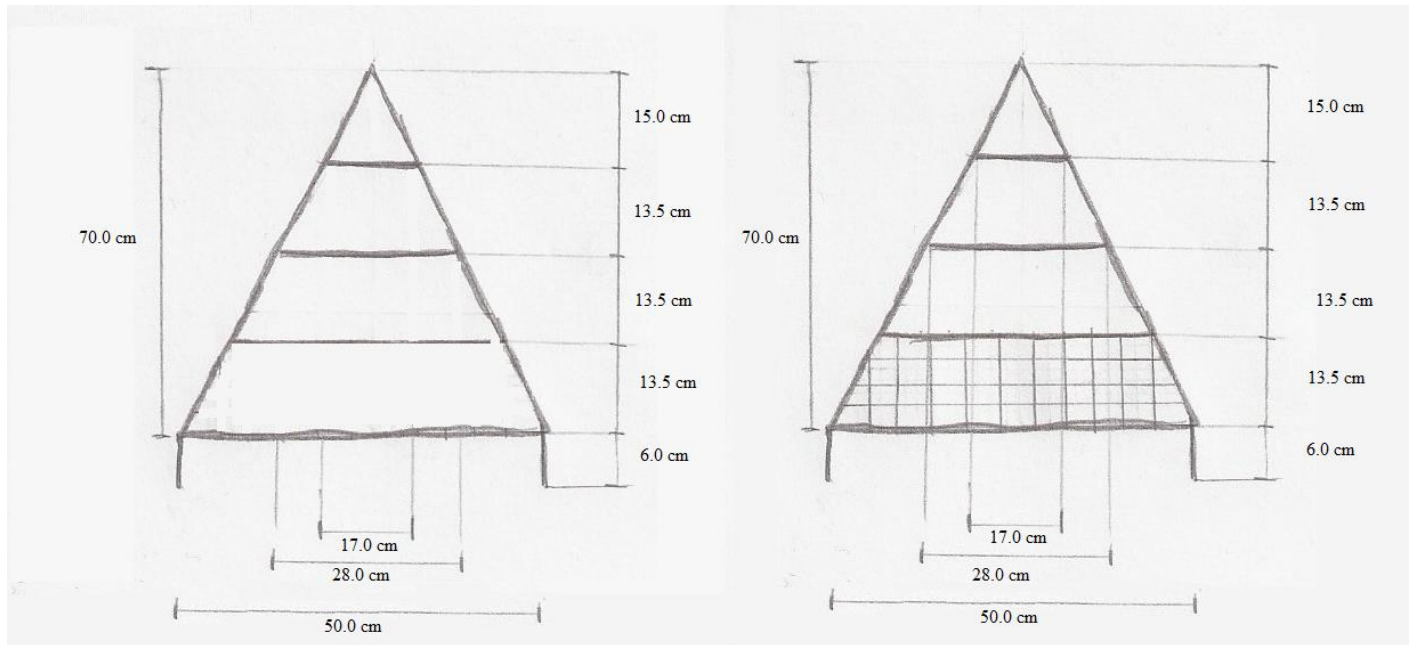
Sketch of the metal cage, side view (left) and front view (right) (sketch: Paul Kreiner)
